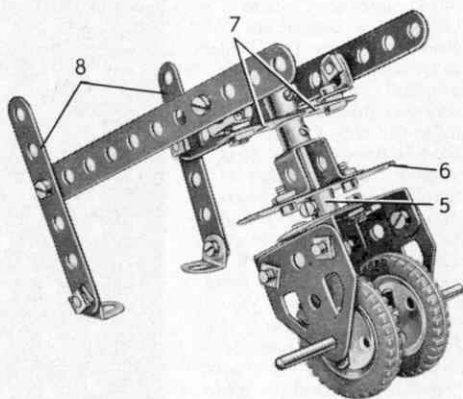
A close-up view of the front wheel assembly removed from the chassis to show the layout of the steering controls.
